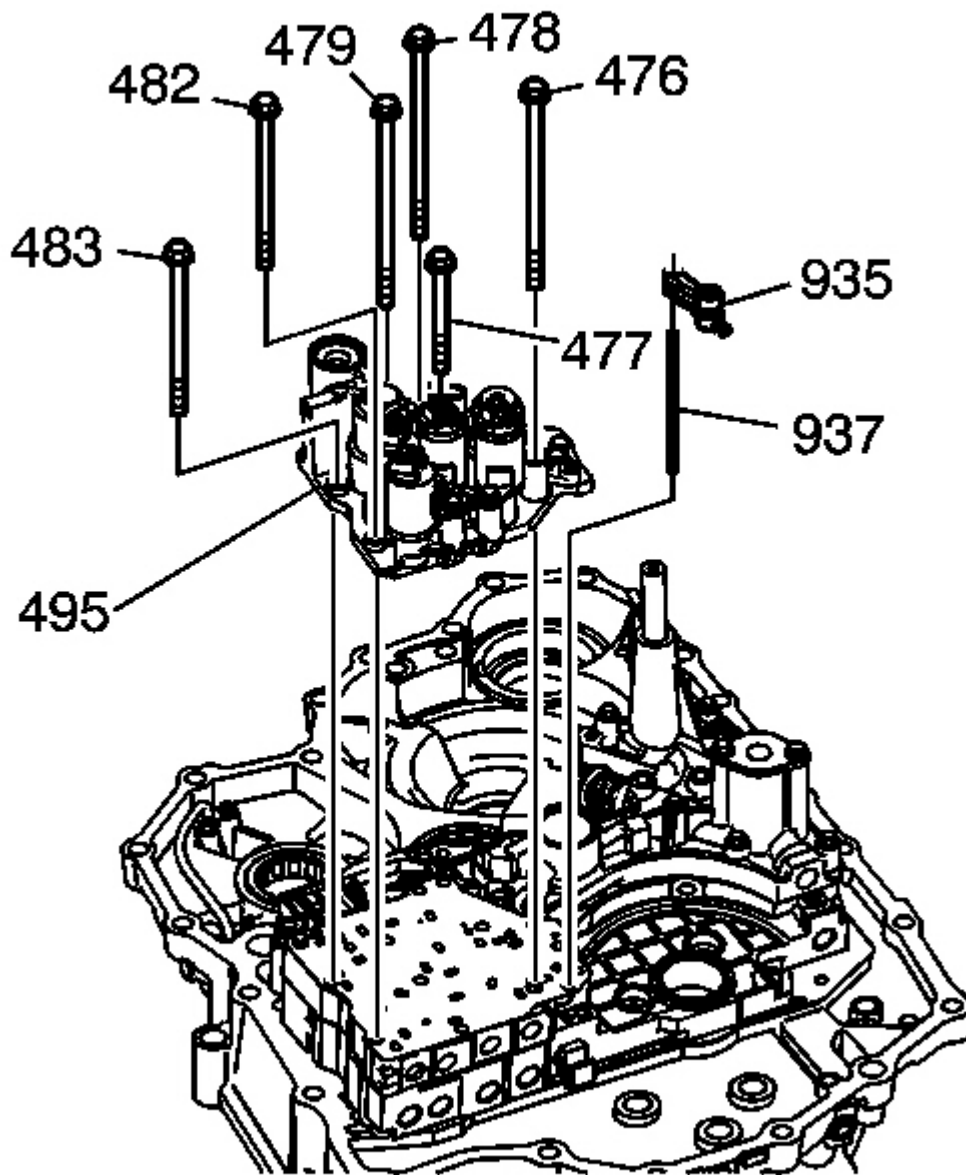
Manual Shift Shaft Detent Roller, Pin & Bolts
